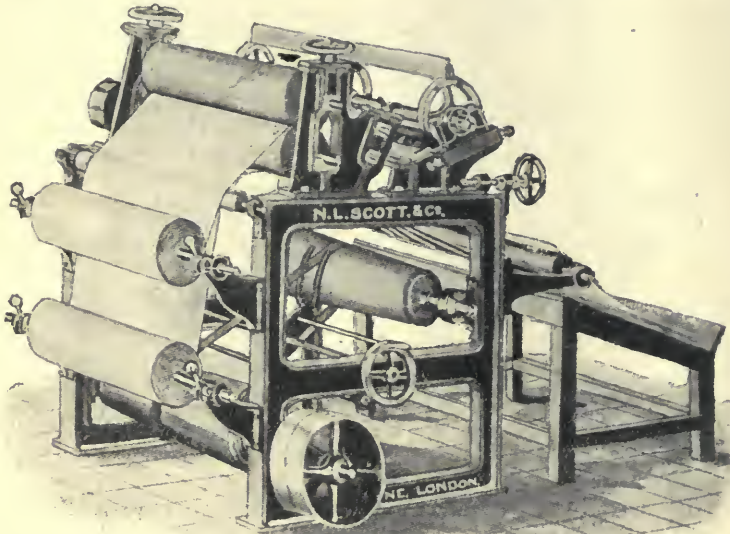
N. L. SCOTT & Co.'s ROTARY PAPER CUTTING MACHINE.
